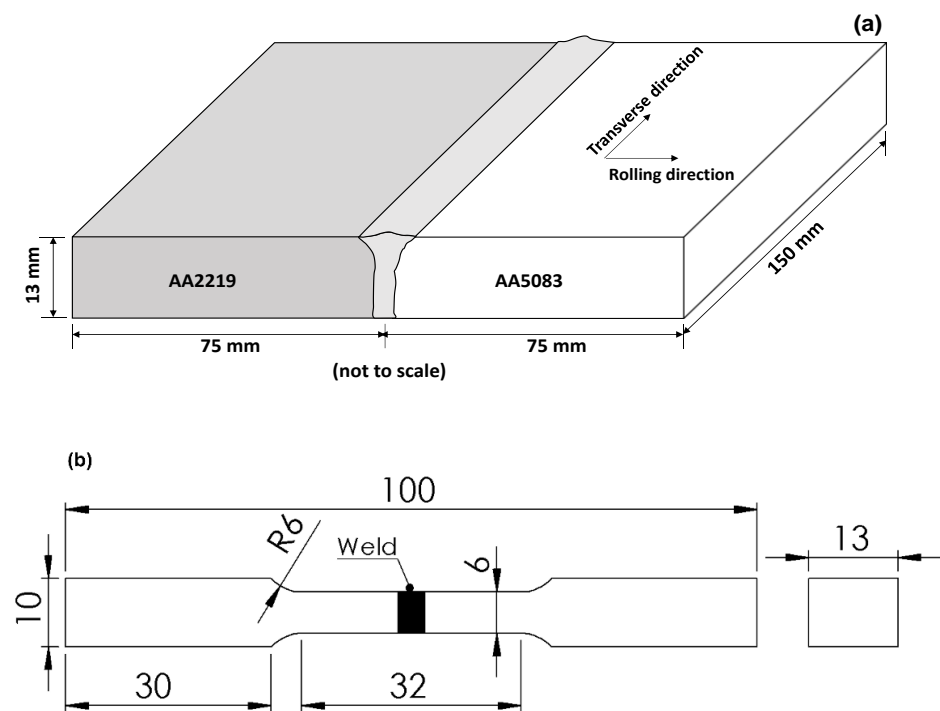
(a) Schematic arrangement of weld coupon; (b) schematic of the subsize tensile specimen (All dimensions are in mm).
